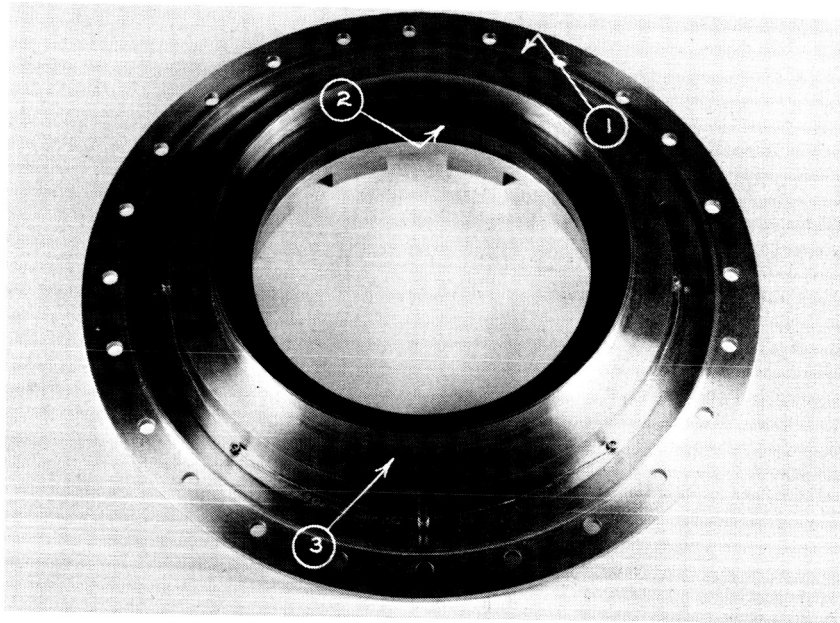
Orifice - Compensated Hydrostatic Seal 1. Carrier 2. Seal-Ring Assembly 3. Assembly Guard (XP-66913)
